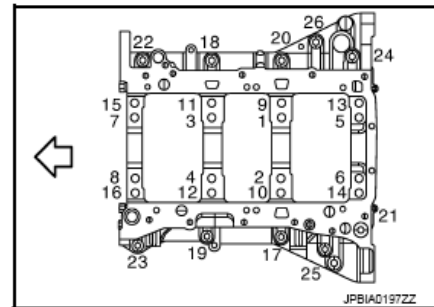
Identifying Lower Cylinder Block Bolts Tightening Sequence
